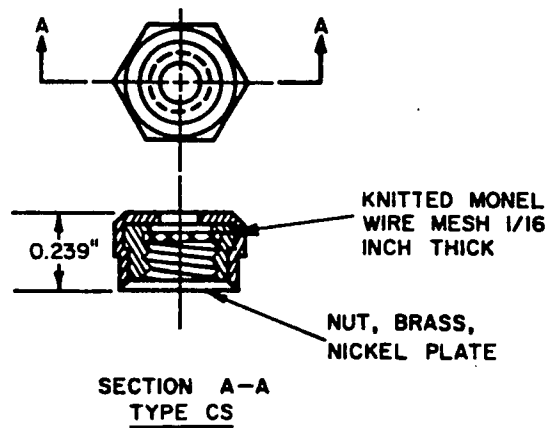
RFI-Shielded Rotary Shaft Seal
